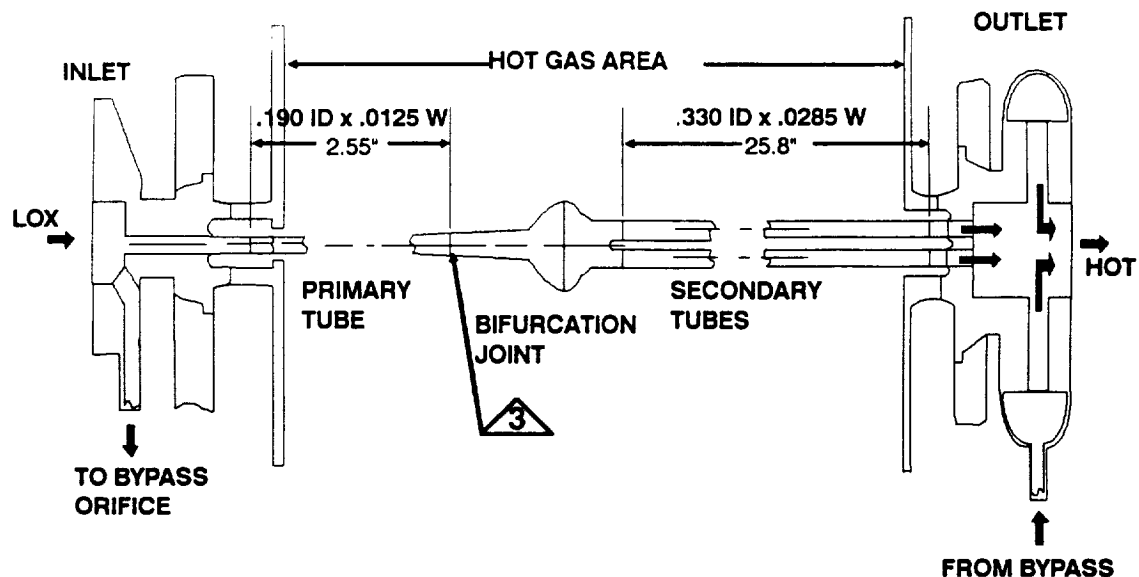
Detail of the HPOTP Heat Exchanger Coil Small Tube Outlet Near Weld 3
